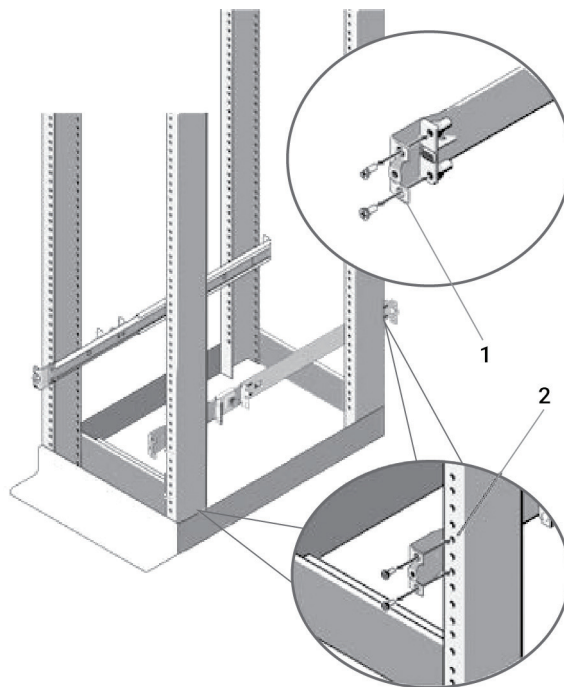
FOUR-POST THREADED CONFIGURATION
